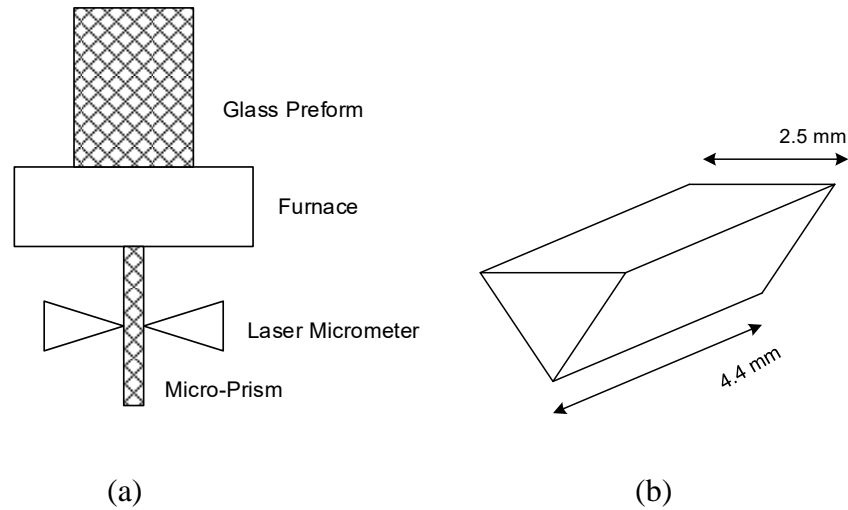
(a) Drawing process of a micro prism and (b) geometry.
